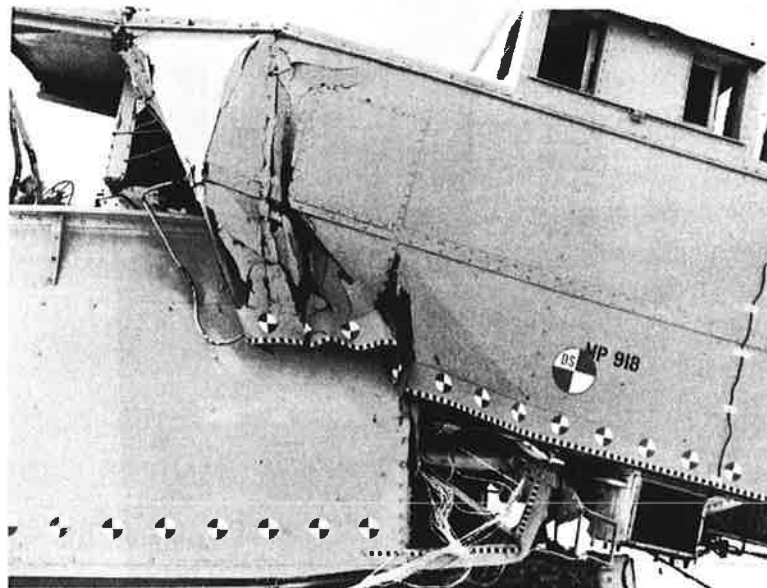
POST-TEST FRONT END OF CABOOSE - TEST 8.
